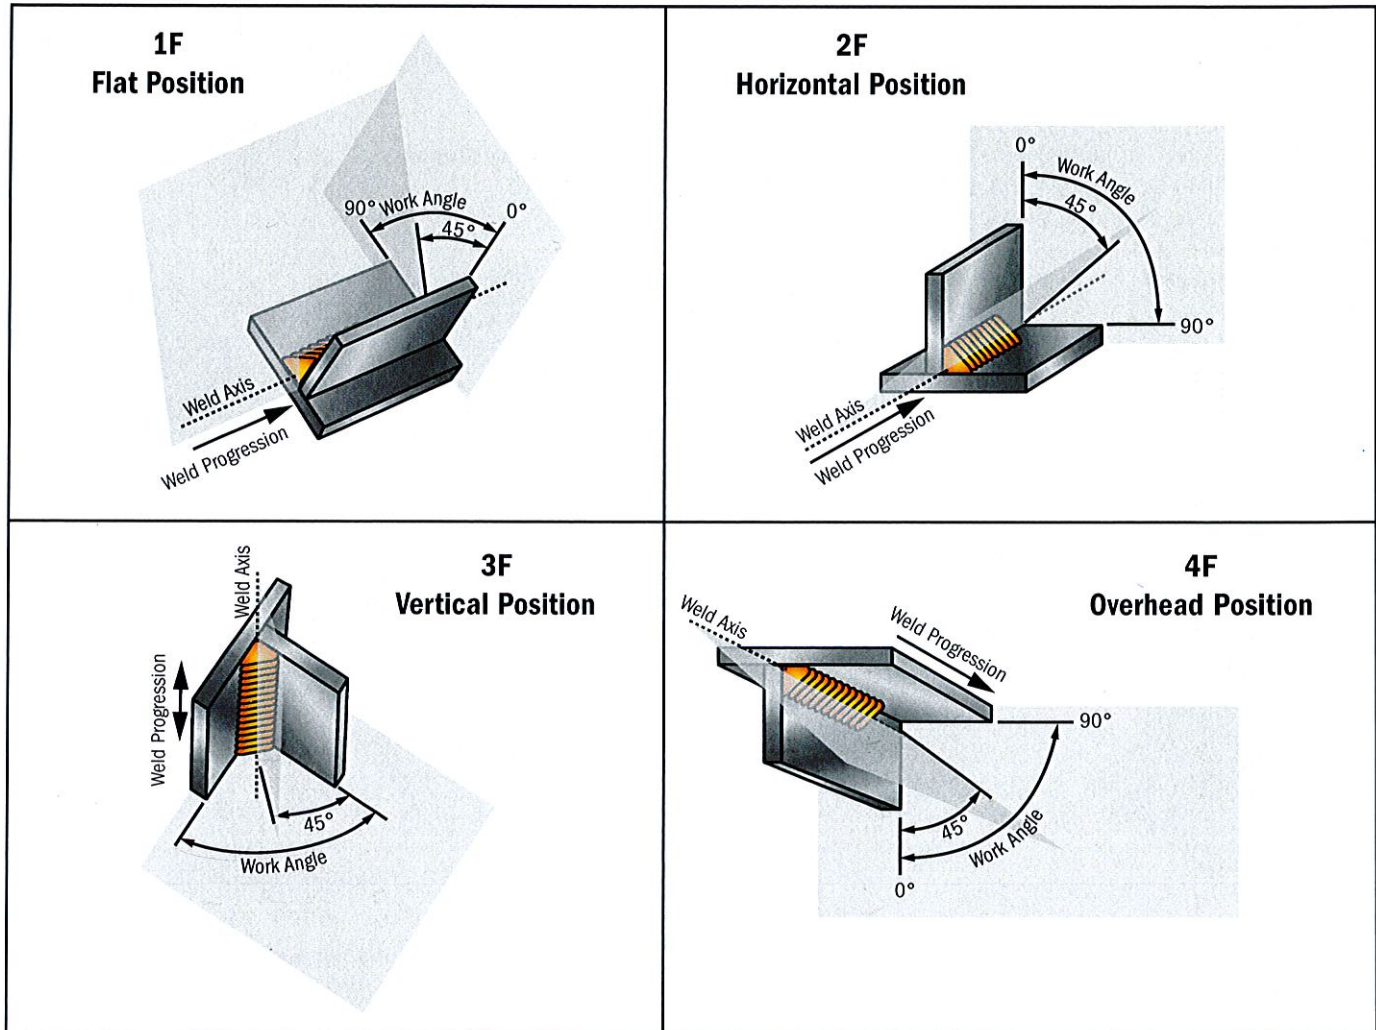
Electrode Work Angles For Fillet Welds Notice The Angle Is Measured Perpendicular To The Nonbutting Member..
